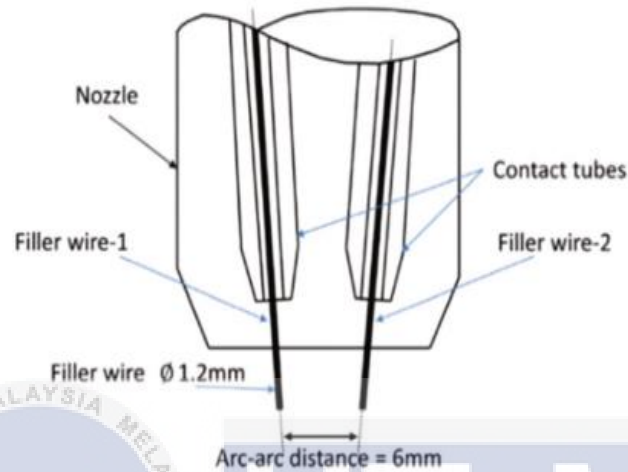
Schematic of twin-wire welding torch for WAAM (Pan et al., 2018)
